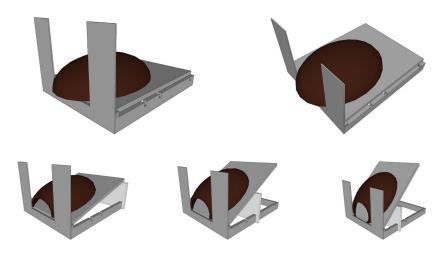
Jig for disc sander to grind the coconut shell to a desired angle and width
